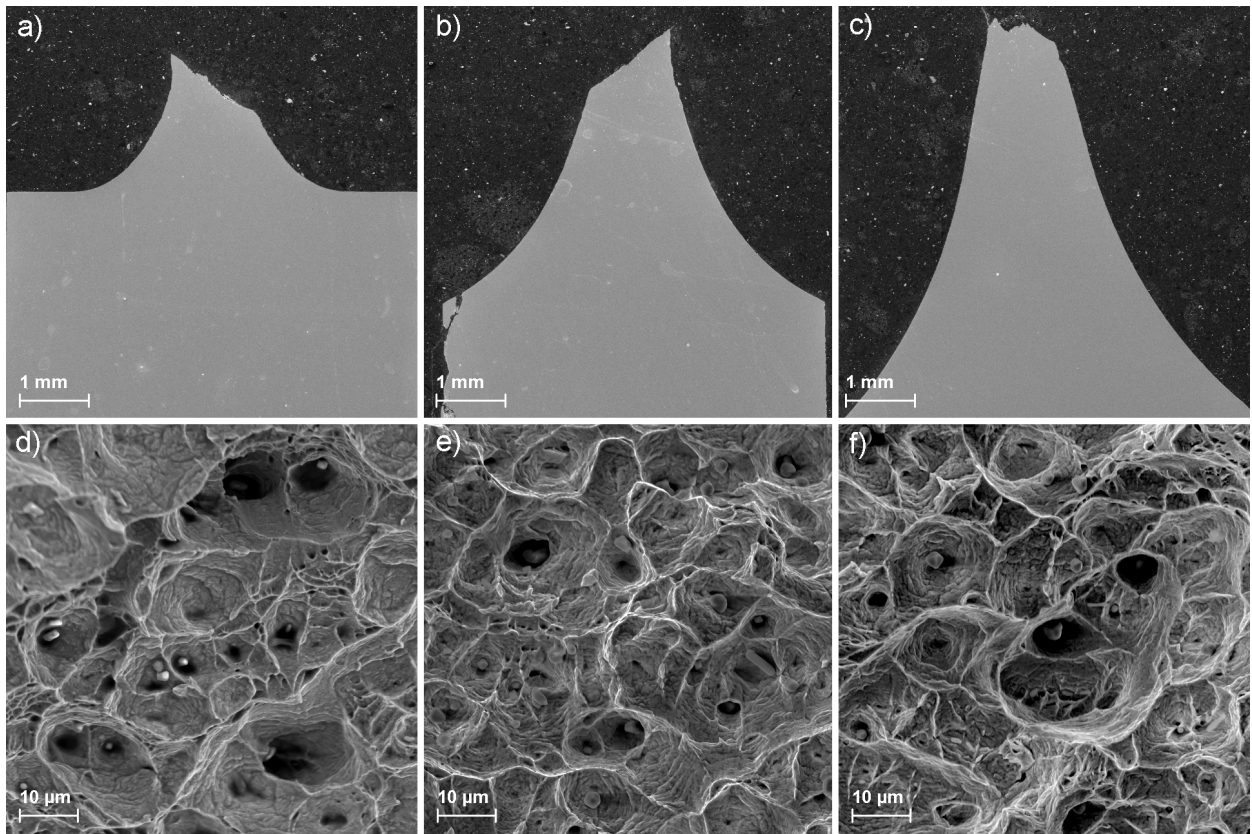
Micrographs of the fracture surface of the 7GRx specimens: left figures (a, d) - 7GR1 specimen, central figures (b, e) - 7GR3 specimen, and right figures (c, f) - 7GR6 specimen. Three top figures correspond to the side views of the fracture surface while the three bottom figures show the corresponding fracture surface at high magnification.
